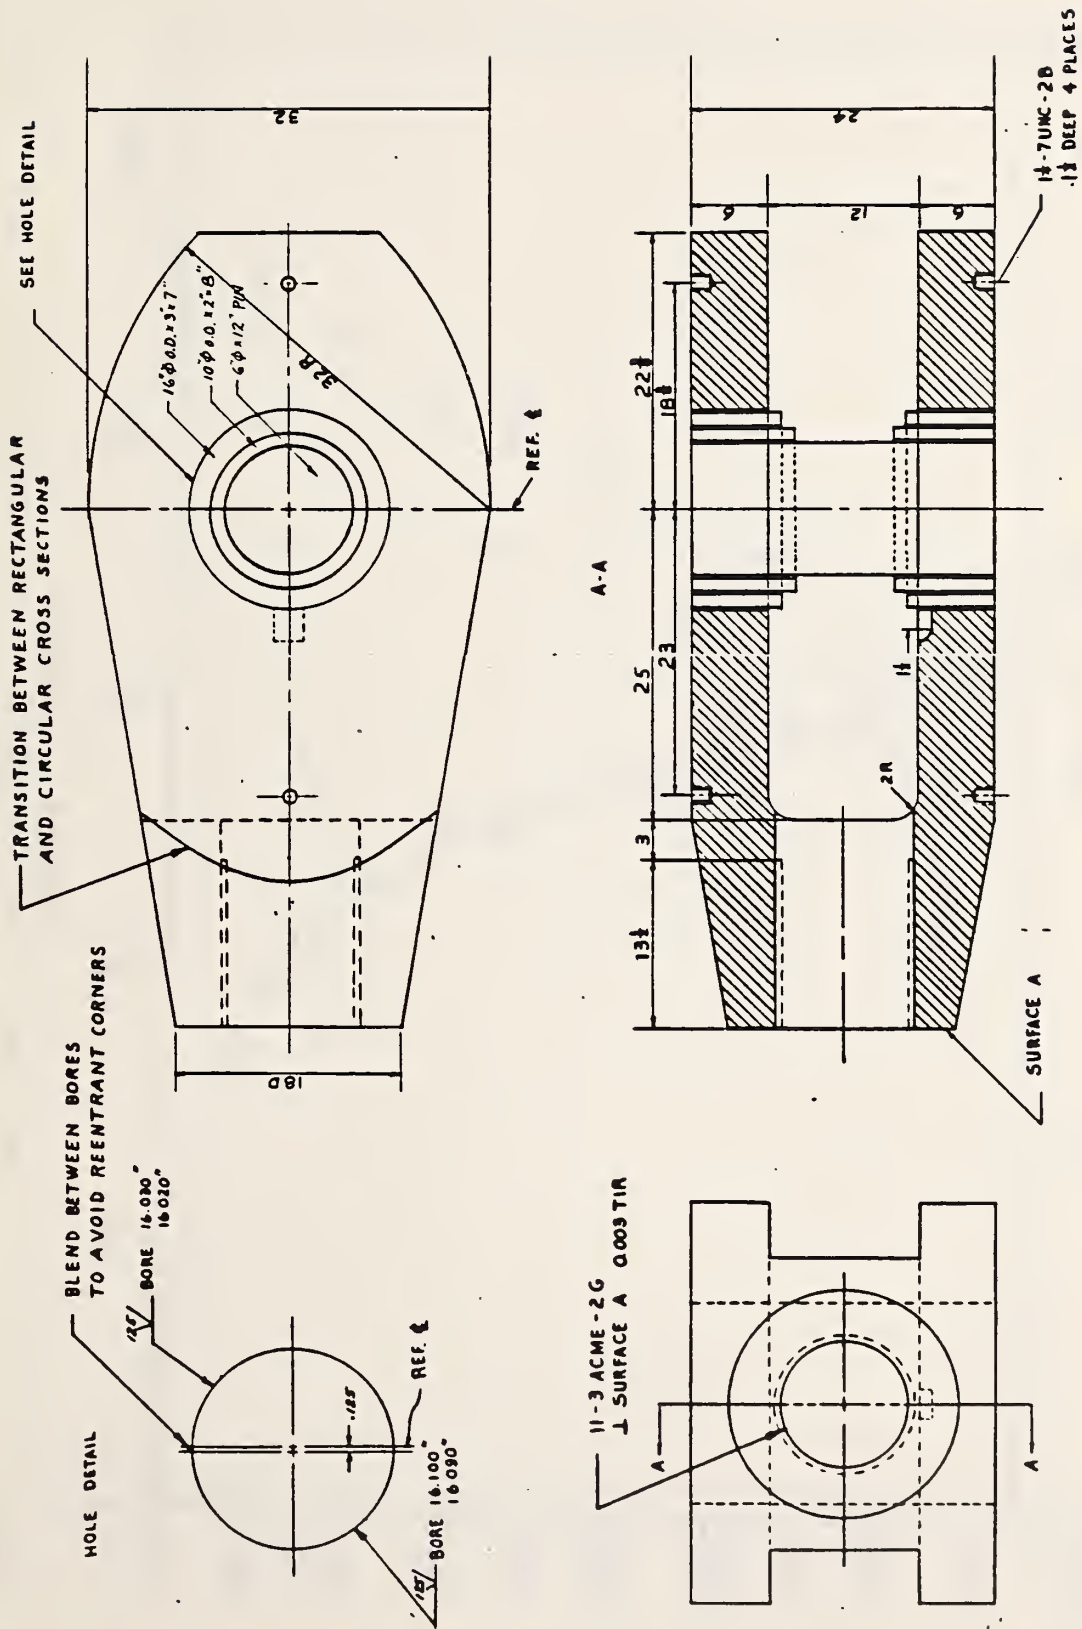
Special fixtures for attachment of rope to built-in clevises.
